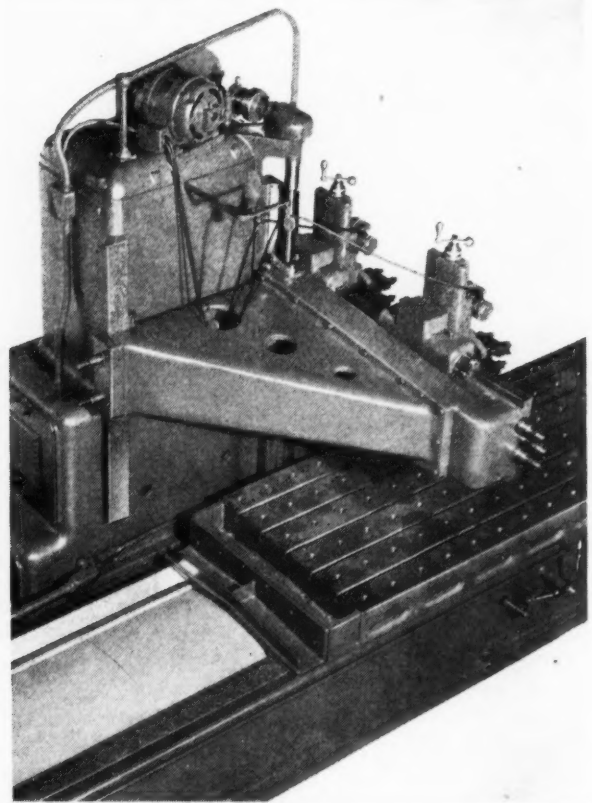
The Cross-rail is Supported at the Back by a Brace of Rigid Box Section which Spans the Deep Column
